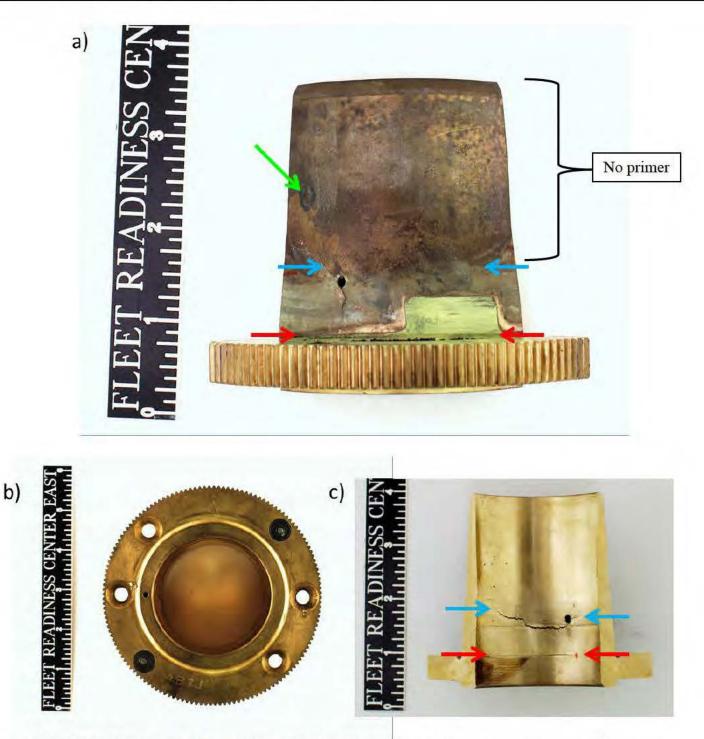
P2B4 Blade Bushing; a) View from side showing crack locations; b) View looking outboard; c) Looking at ID of cracked section. Green arrow indicated lead flake. Blue arrows bracket outboard crack and red arrows bracket inboard crack.
